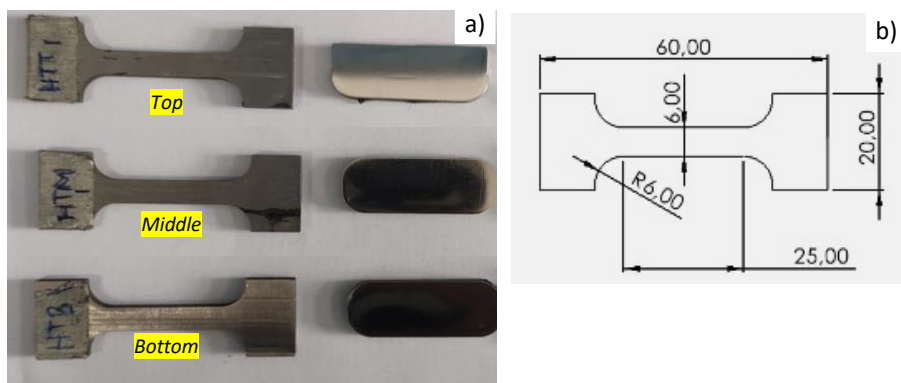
Result of deposit cutting (a) and specimen dimensions in mm (b)
